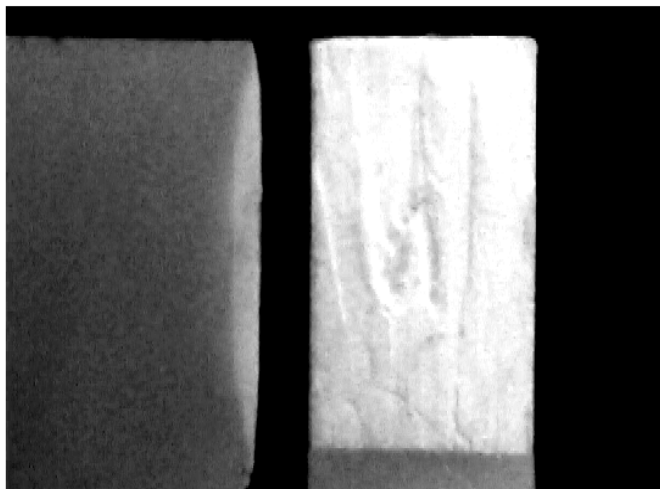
Fracture surface and side view of a broken sample of ABS.
